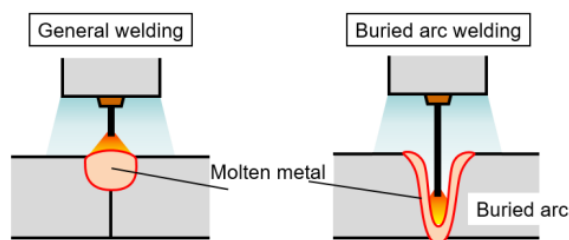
The difference between classical welding and welding with "Buried Arc".
